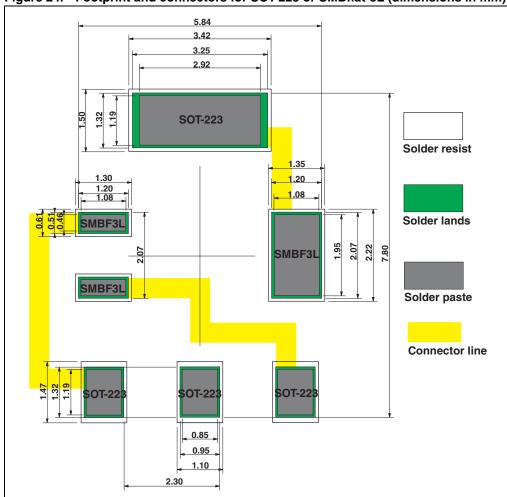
Footprint and connectors for SOT-223 or SMBflat-3L (dimensions in mm)
